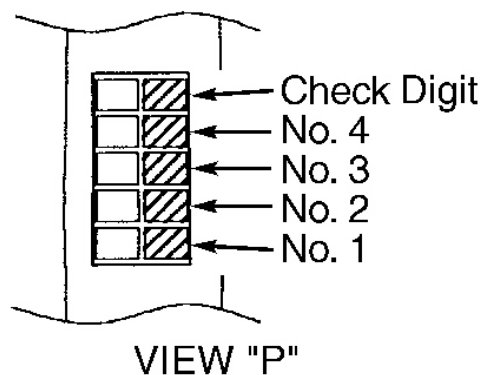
Locating Rod Bearing Color Code (1.5L & 1.8L)
